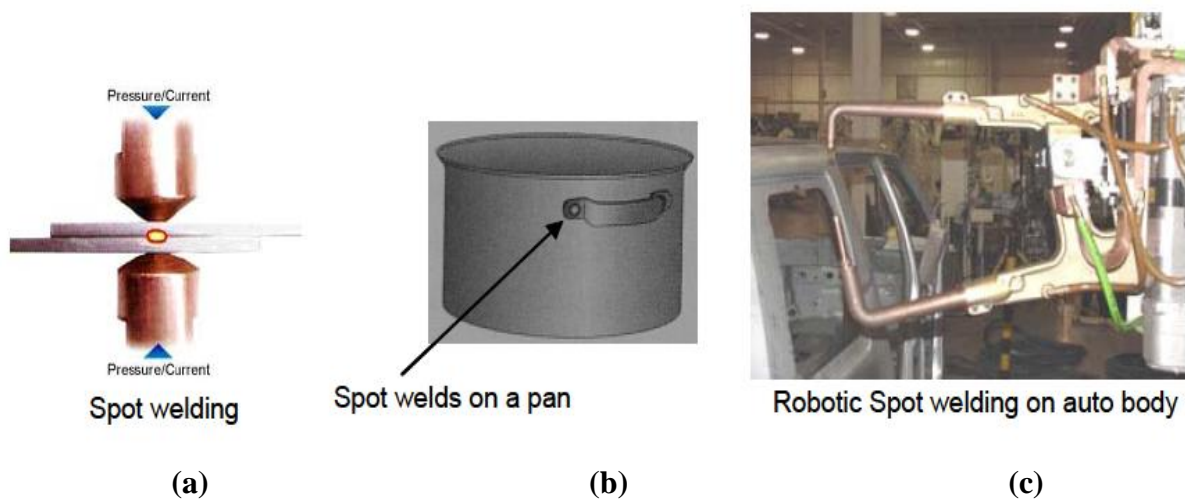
(a) Spot welding (b) and (c) Examples of resistance welding
